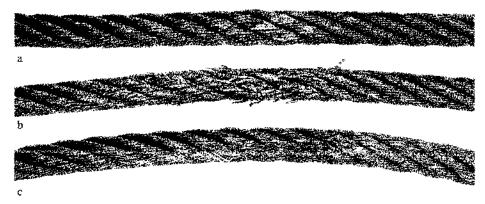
These rope damages—the result of had drum winding—are referred as: a) layer-to-layer crushing, b) scrubbing at cross-over or flange tumback, and c) layer-to-layer crushing.
